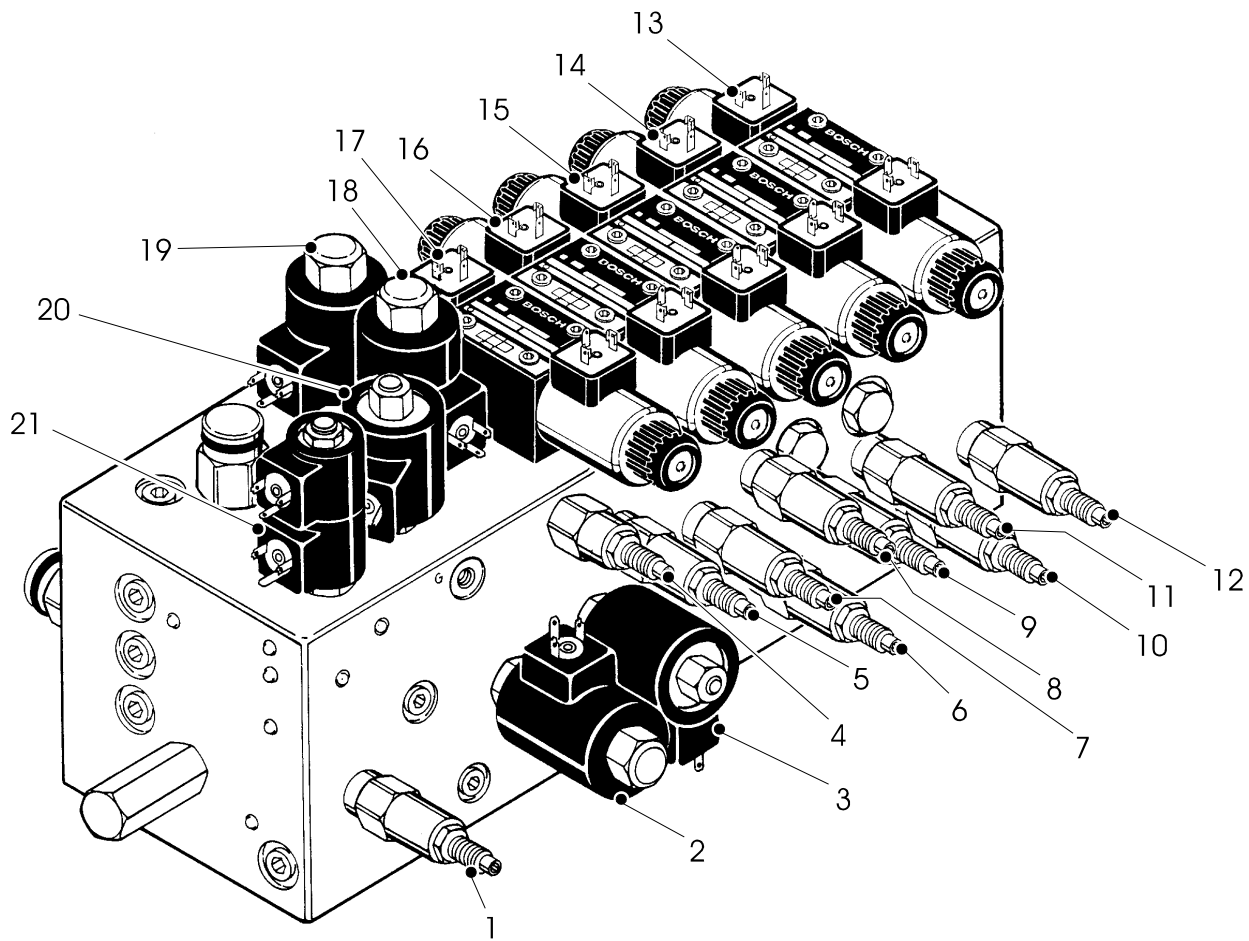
Pressure Setting Adjustments - Frame Valve - Machines Built Before S/N 38697
